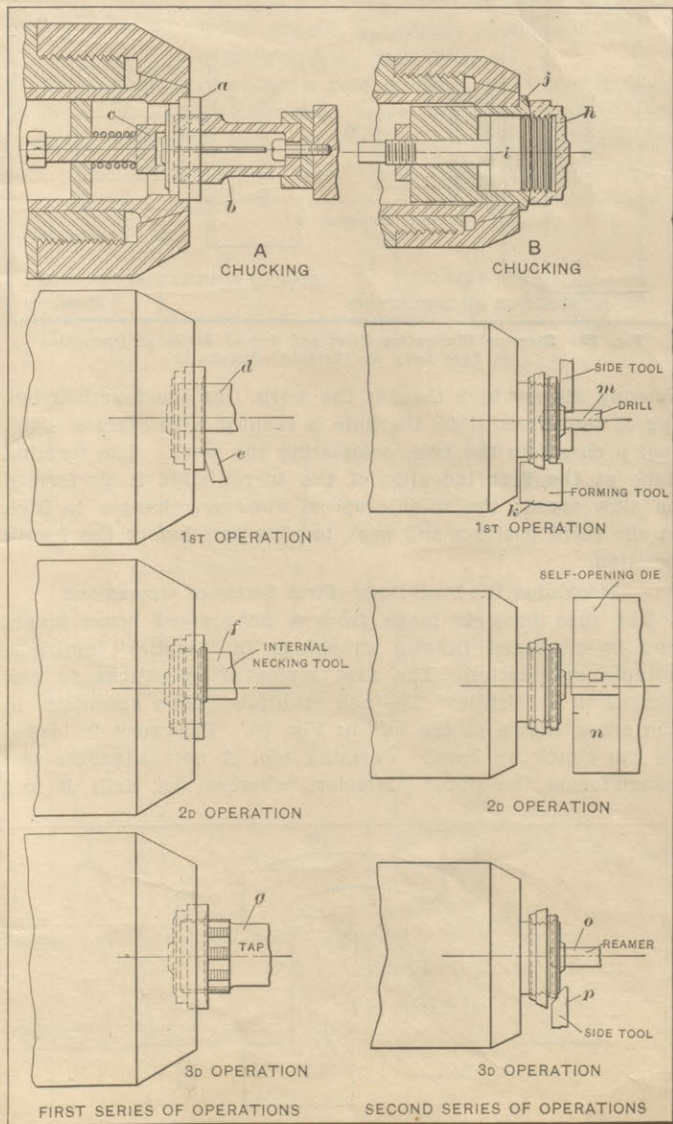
Machining Brass Fuse Socket on 3 1/4-inch "Gridley" Automatic Turret Lathe—First and Second Series of Operations
